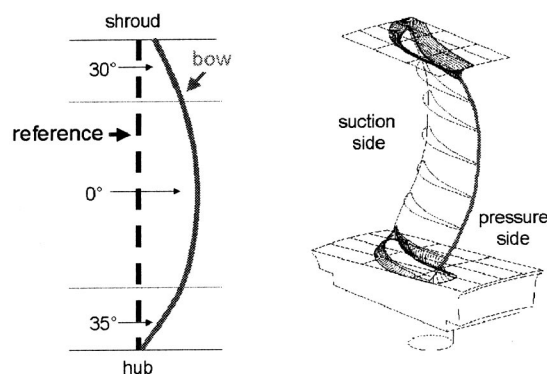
Stacking line of bow vane and drawing of bowed stator 3
